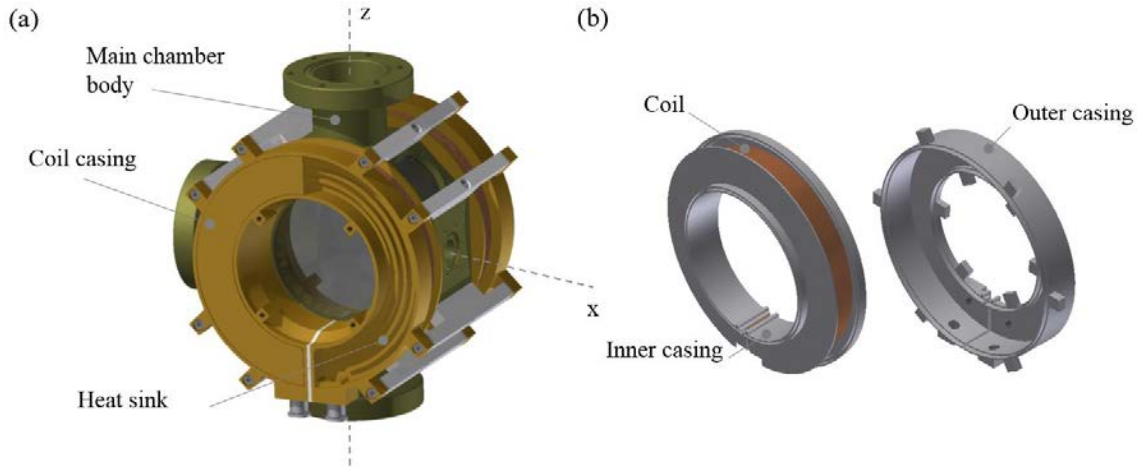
(a) Render of the 3D-MOT chamber assembly. (b) Circular anti-Helmholtz coil casing.
